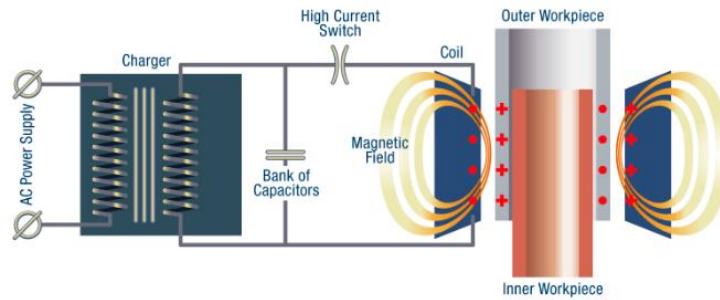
Scheme of multi layer pipe magnetic pulse welding [53]
